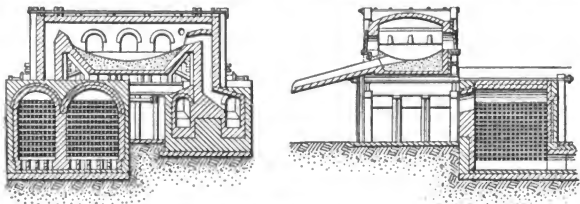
LONGITUDINAL AND TRANSVERSE SECTIONS OF OPEN-HEARTH STEEL FURNACE.
